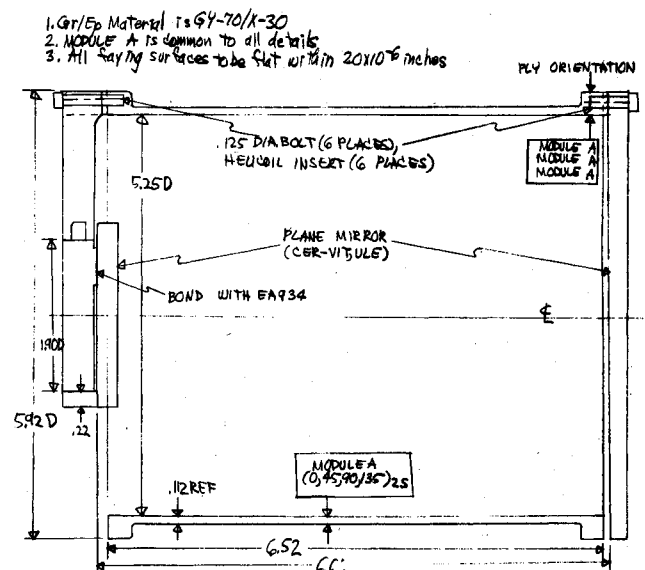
Telescope drawing (gr/ep, mirrors) assembly.
